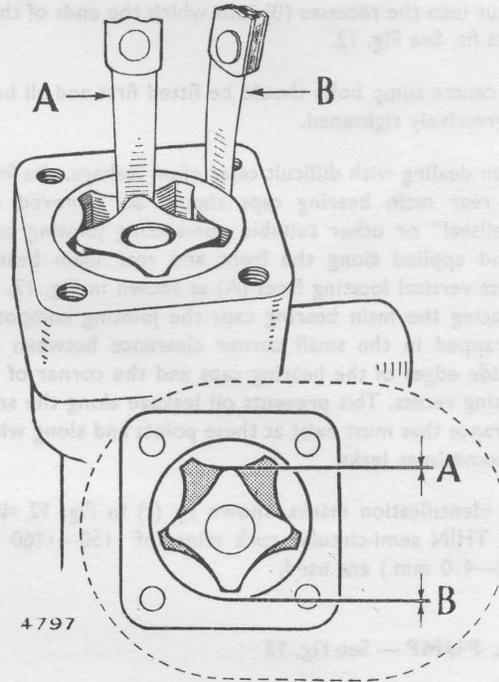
Checking oil pump rotor tip and outer rotor clearance.
